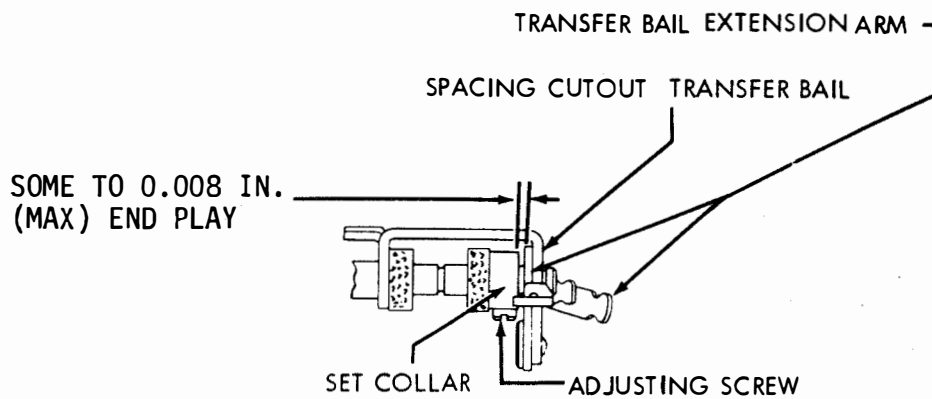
Spacing Cutout Transfer Bail Set Collar, Bottom View
